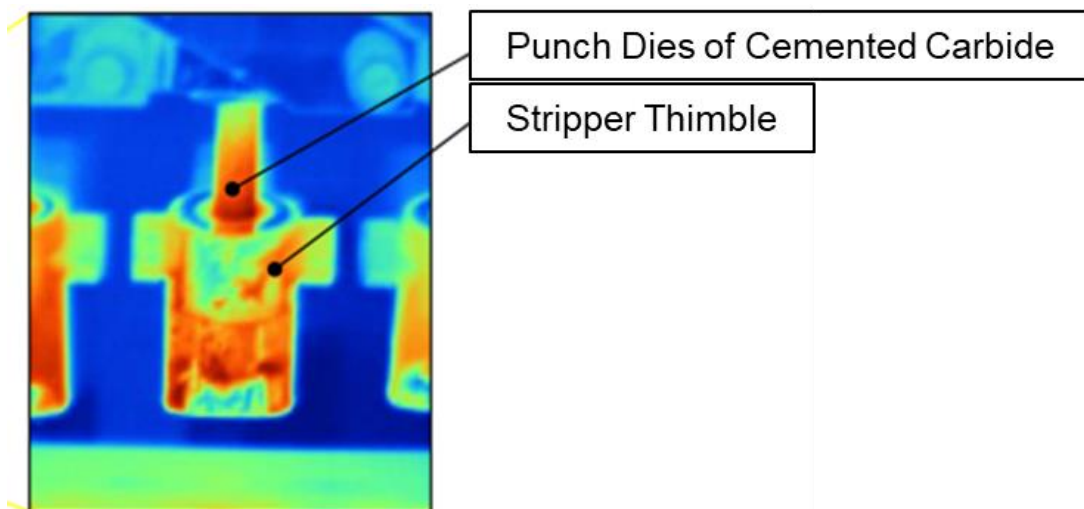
Thermography of cemented carbide punch die and stripper thimbles.
